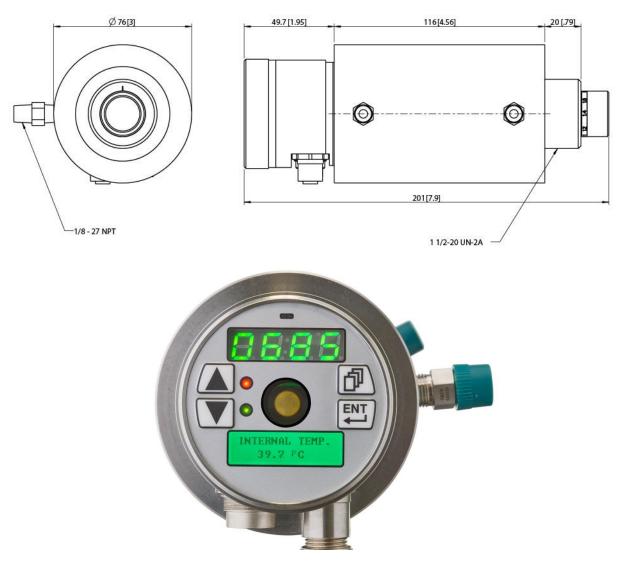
Endurance® Head with Air/Water-Cooled Housing Option
